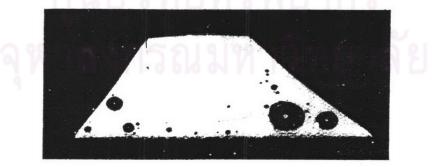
Cross-section of a component lead, which has been reflowing soldered to an alumina substrate using a solder paste. The solder joint contains a large number of holes, which is not an exception.⁶
